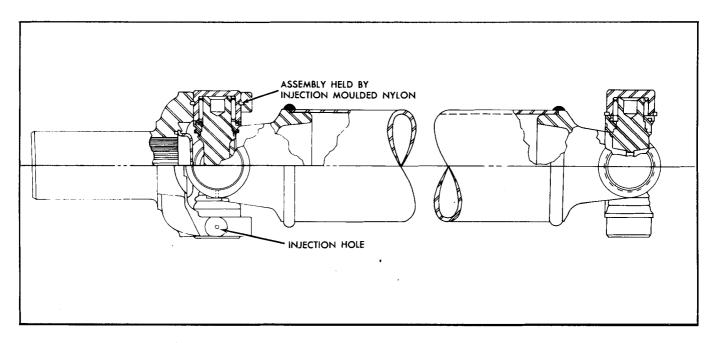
E-1 Typical View of Propeller Shaft with Single Cardon Rear U-Joint
